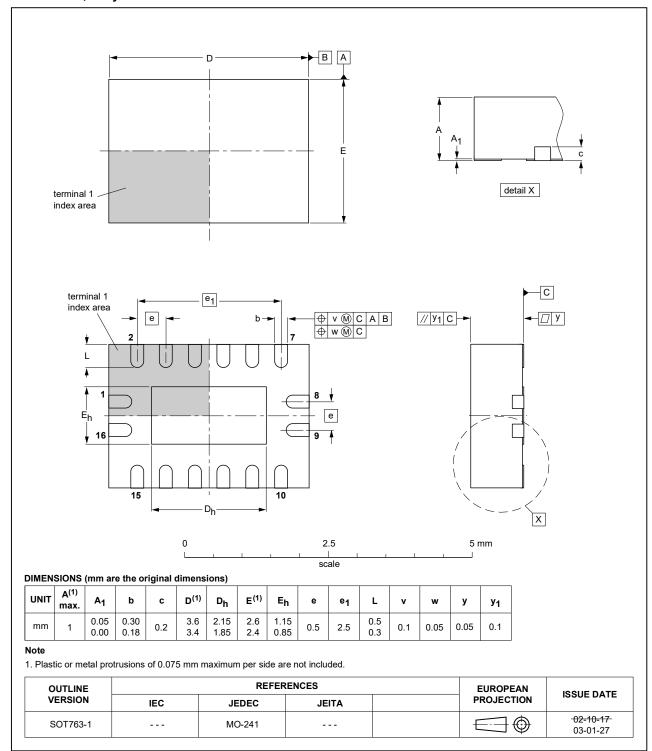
Package outline SOT763-1 (DHVQFN16)
